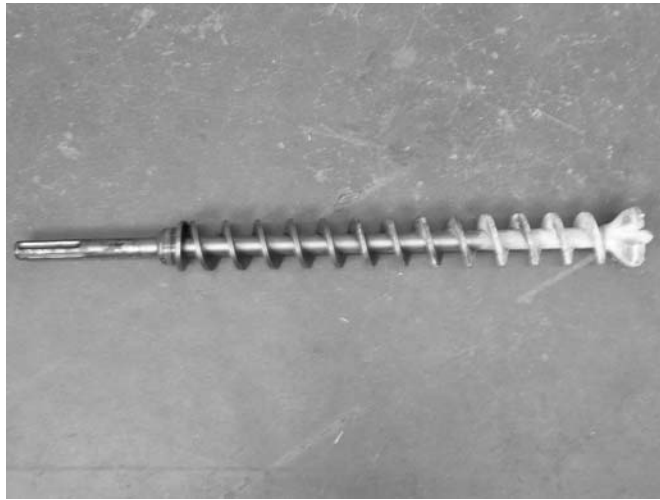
2-in. rotary hammer drill cruciform bit
